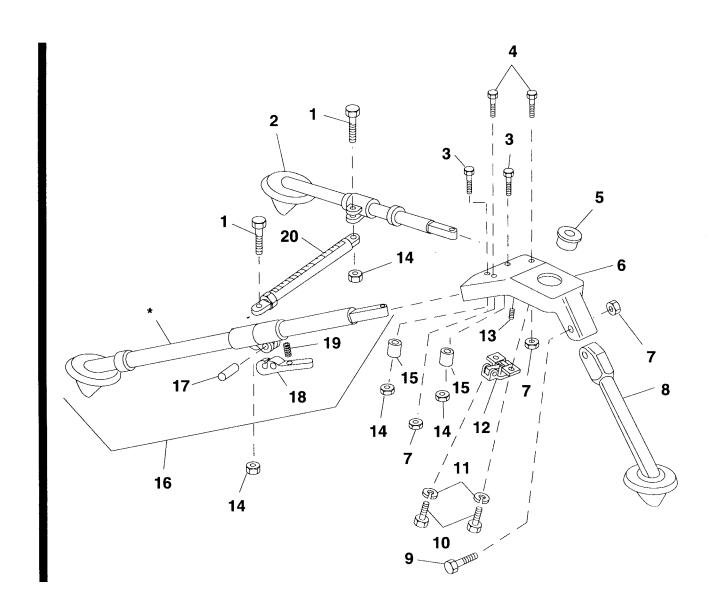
Mount, Tripod, Machine Gun, M122, 7790723, and M122A1, 12976949
